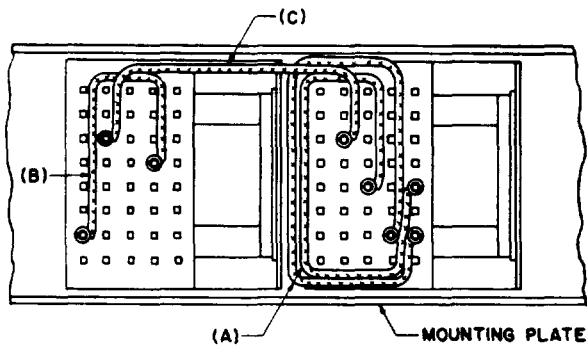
Cross Connections — D-type Terminal Strips on Same Mounting Plate
